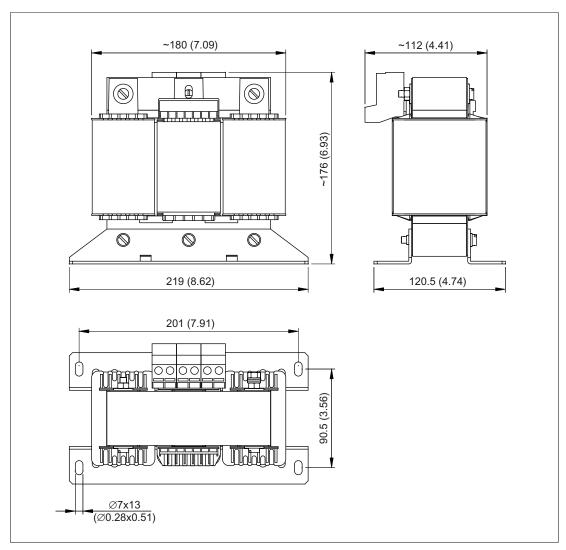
Dimension drawing of the line reactor for S120 Combi (20 kW infeed), all dimensions in mm and (inches)
